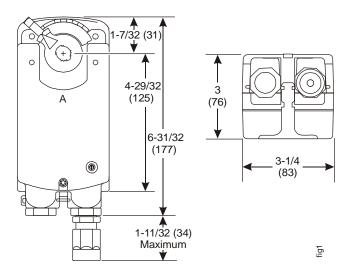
RJ-24-MOD Modulating Electric Spring Return Actuator Dimensions, in. (mm)
